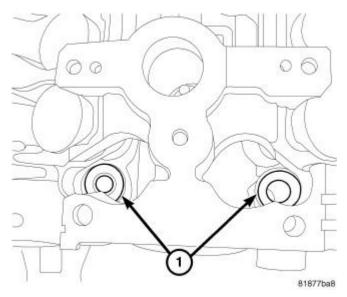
Left Side Intake & Exhaust Camshaft, Camshaft Bearing Caps & Bolts Courtesy of CHRYSLER GROUP, LLC
